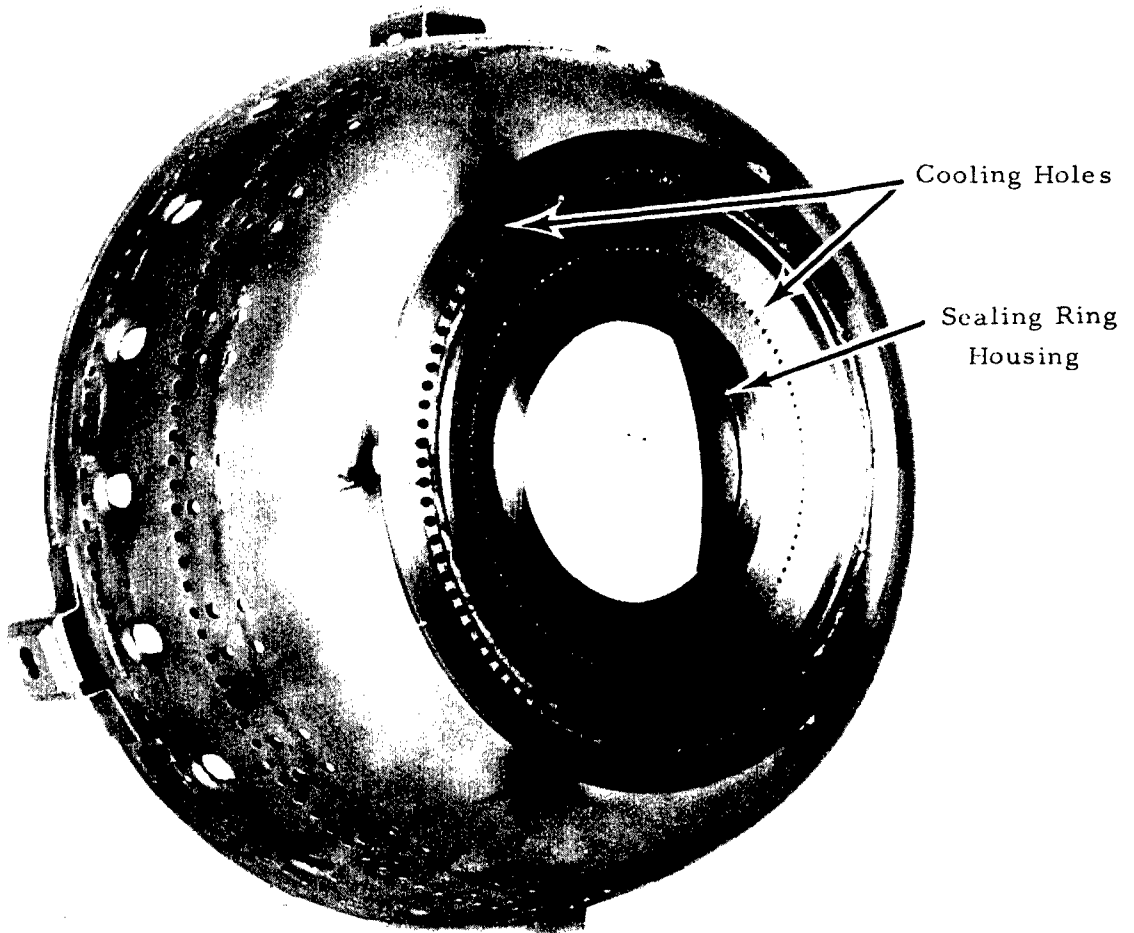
Film-Cooled Swirl Plate Assembled to Outer Combustor Shell.
